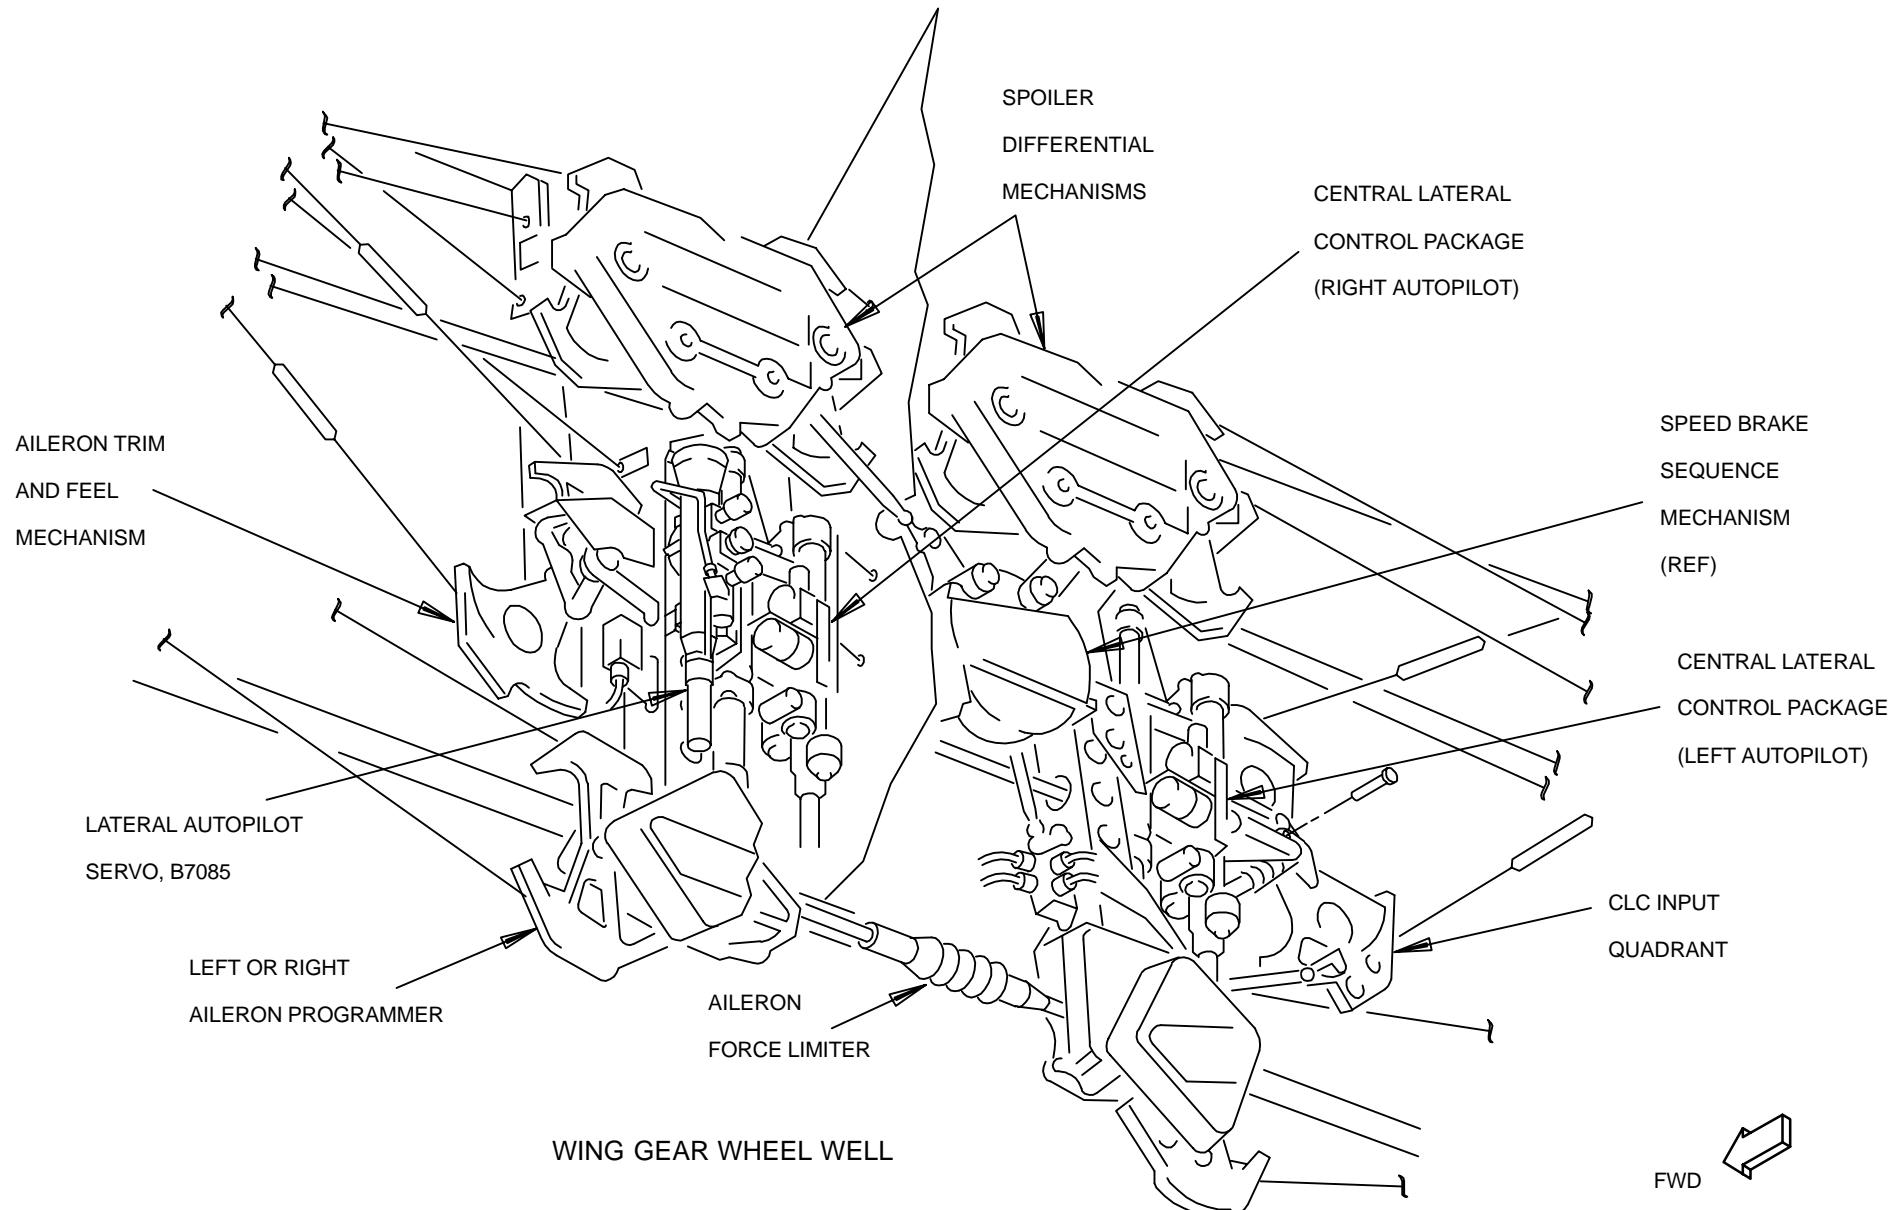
AILERON COMPONENTS - WING GEAR WHEEL WELL
